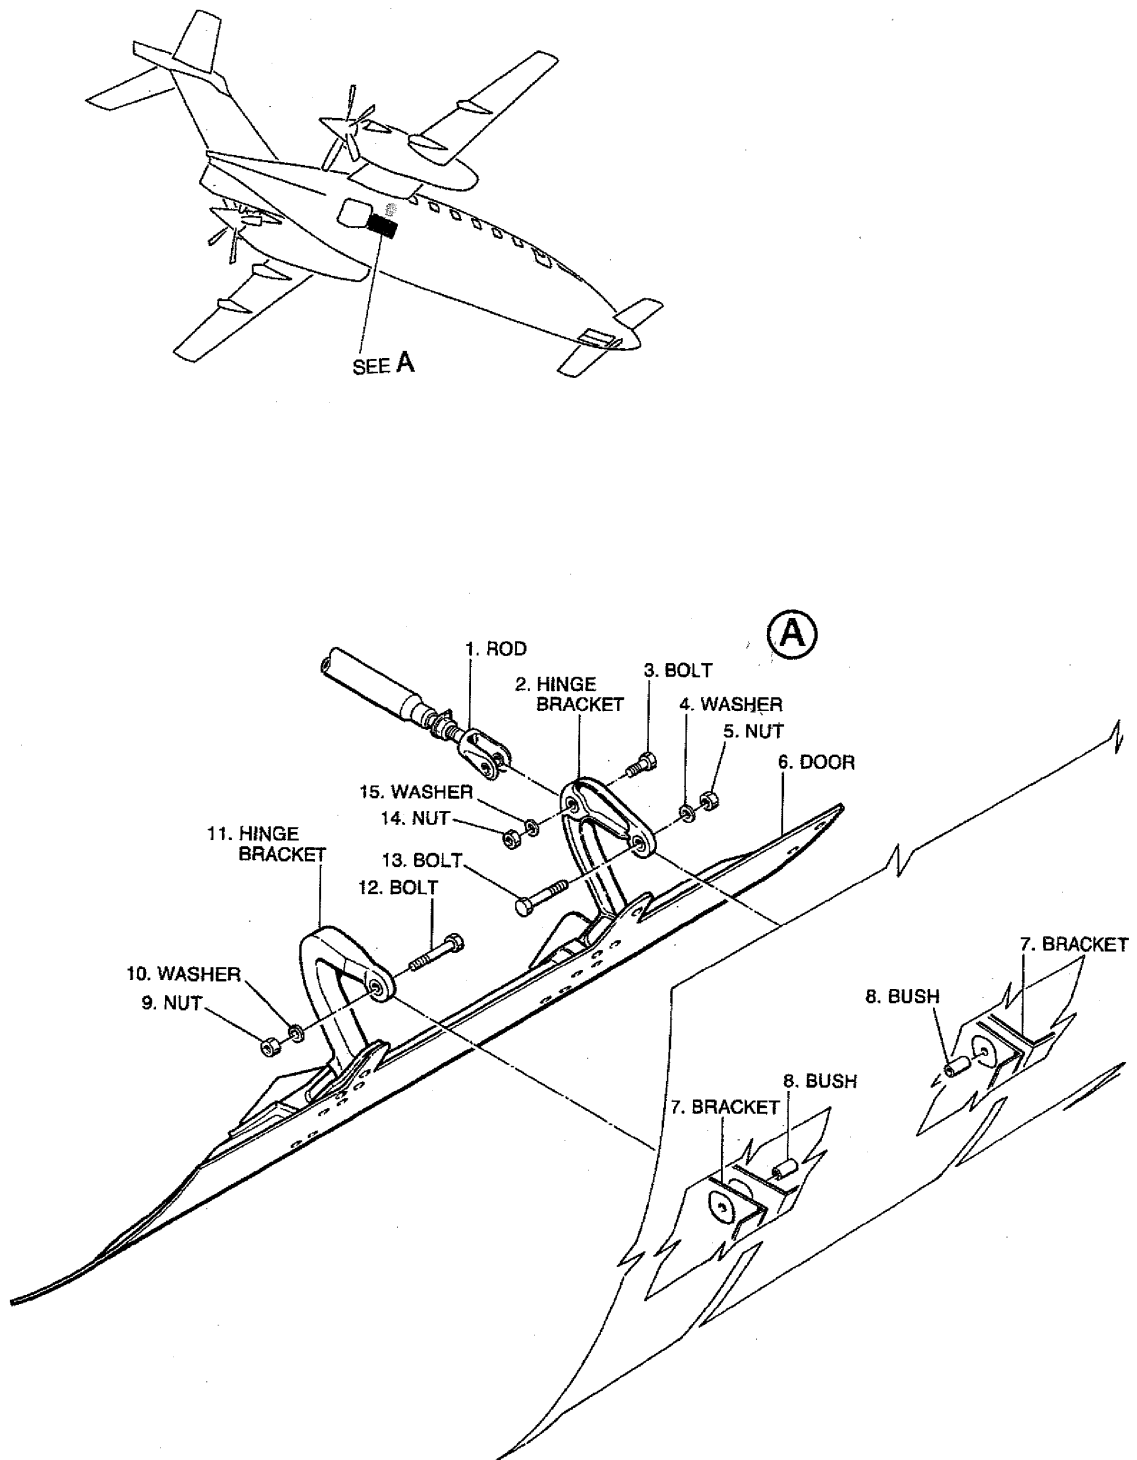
Main Landing Gear Forward Door - Removal/Installation
